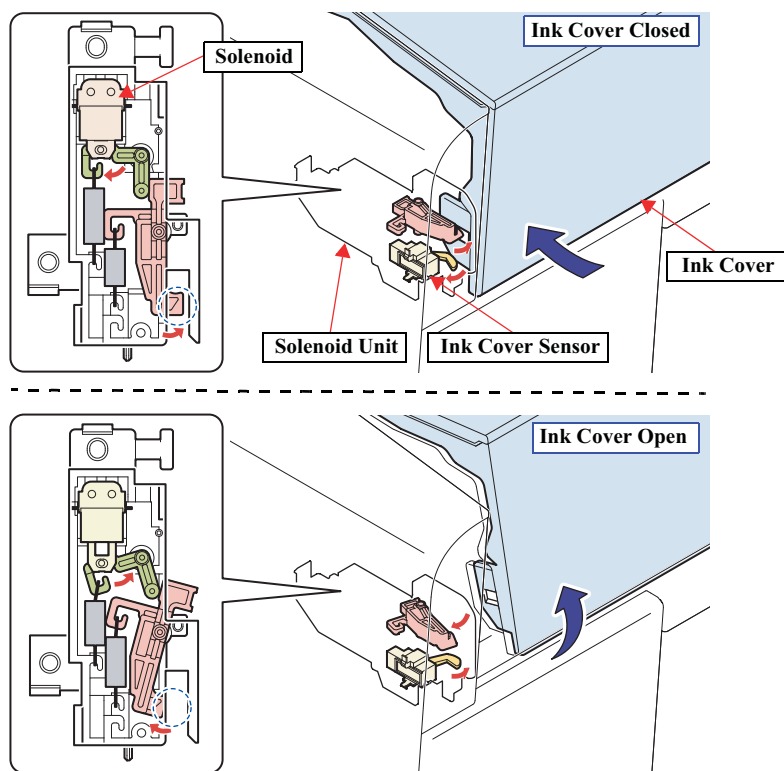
Ink Holder Cover Open/Close Mechanism
